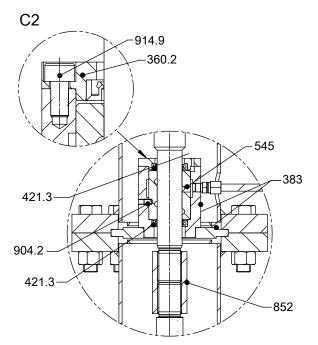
Detail drawings of screwed coupling (only for versions with 2 or 3 support columns)
